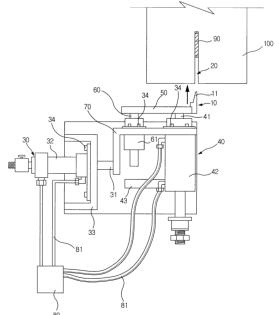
Perspective view of installation and operation of cutting groove separation device of metal plate on metal plate cutting device
